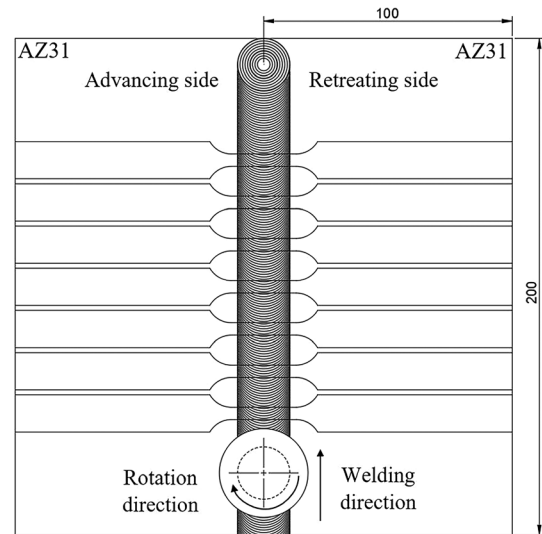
Exact positions of fatigue test specimens removed from a welded plate.¹
